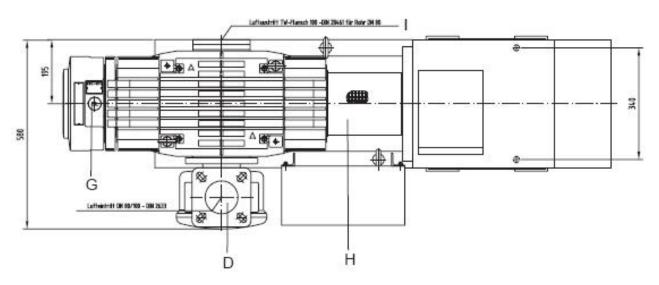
dimensions of the RFL 80/100 compressor package
